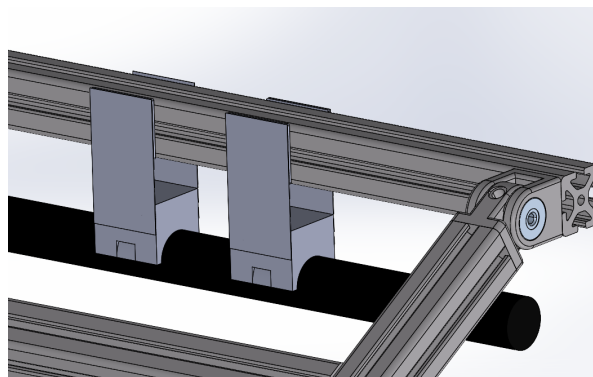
All four flexures installed, connecting the aluminium extrusion profile to the handlebars.
